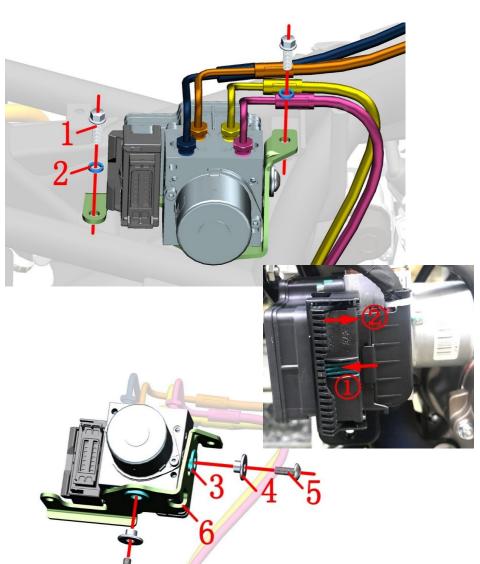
FRONT FORK COMPONENT		ABS brake system-A 1	CHK	(0)
